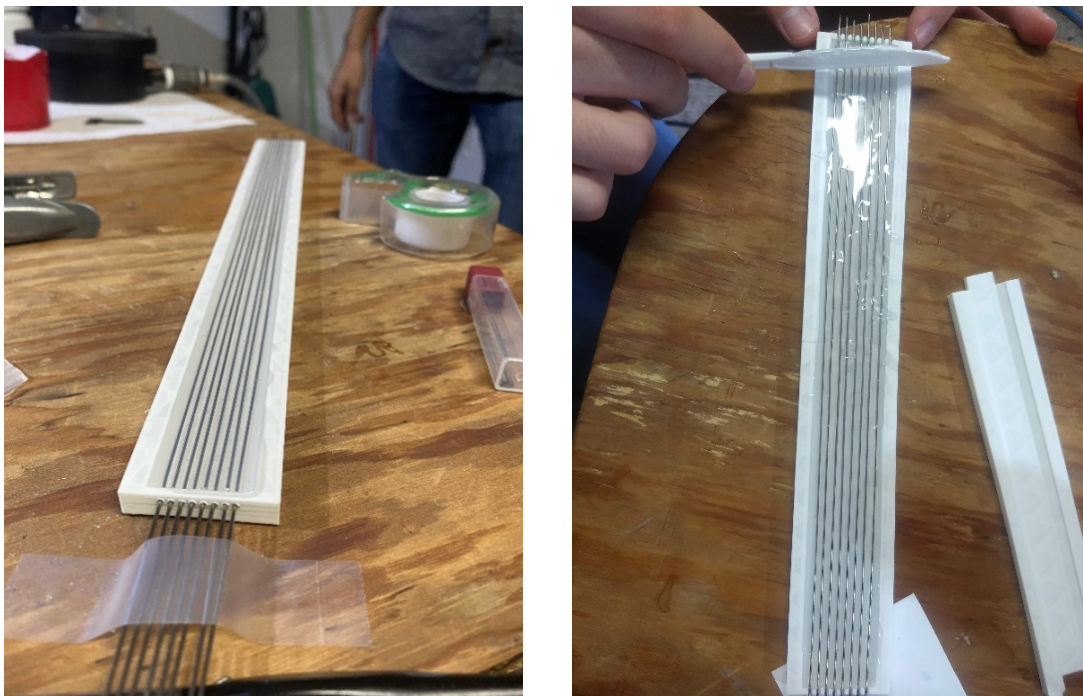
A segment of the mold with hypo-tube cores installed after silicone pour.
